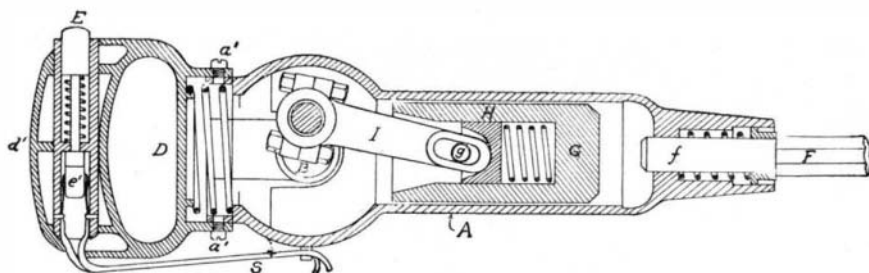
LONGITUDINAL SECTION THROUGH HAMMER.
